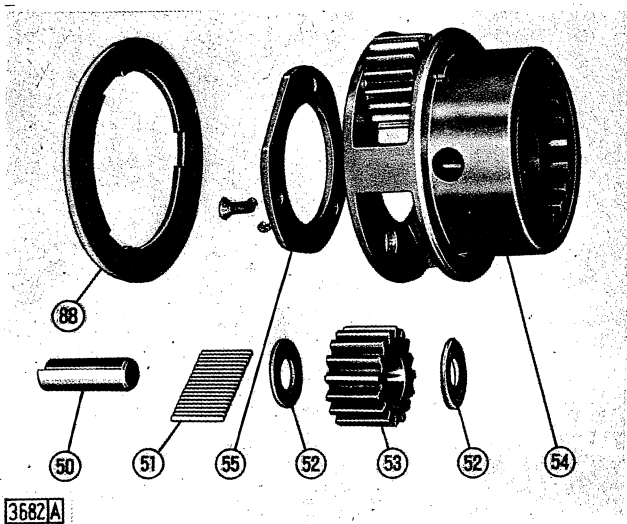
Exploded view of epicyclic unit driven gears support.
